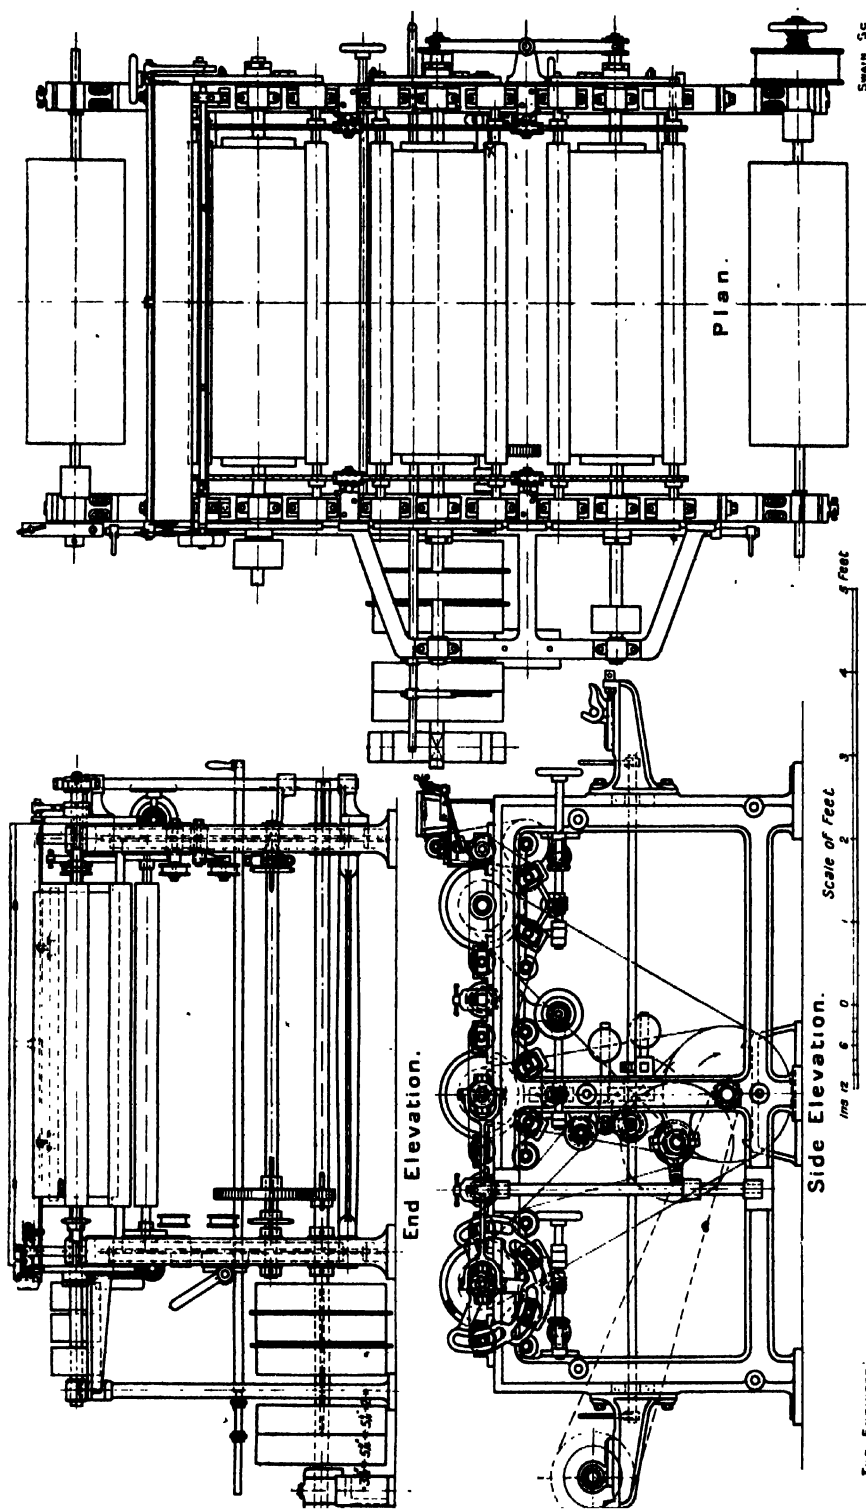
Machine for Brushing Art Paper with French Chalk.—Glossop Ironworks.
